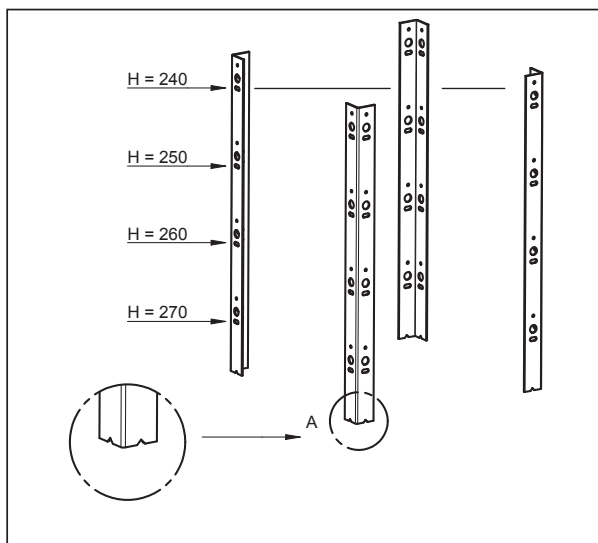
fix the 4 corner pieces in position as shown in the figure using the 8 3.5x6.5 screws provided for the upper part and the 8 3.5x6.5 provided for the lower part.
